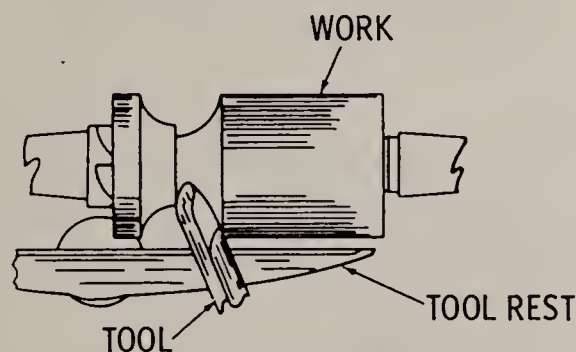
Tool position at the end of the "rolling" cut. The cutting has been done with the side tip of the chisel.
